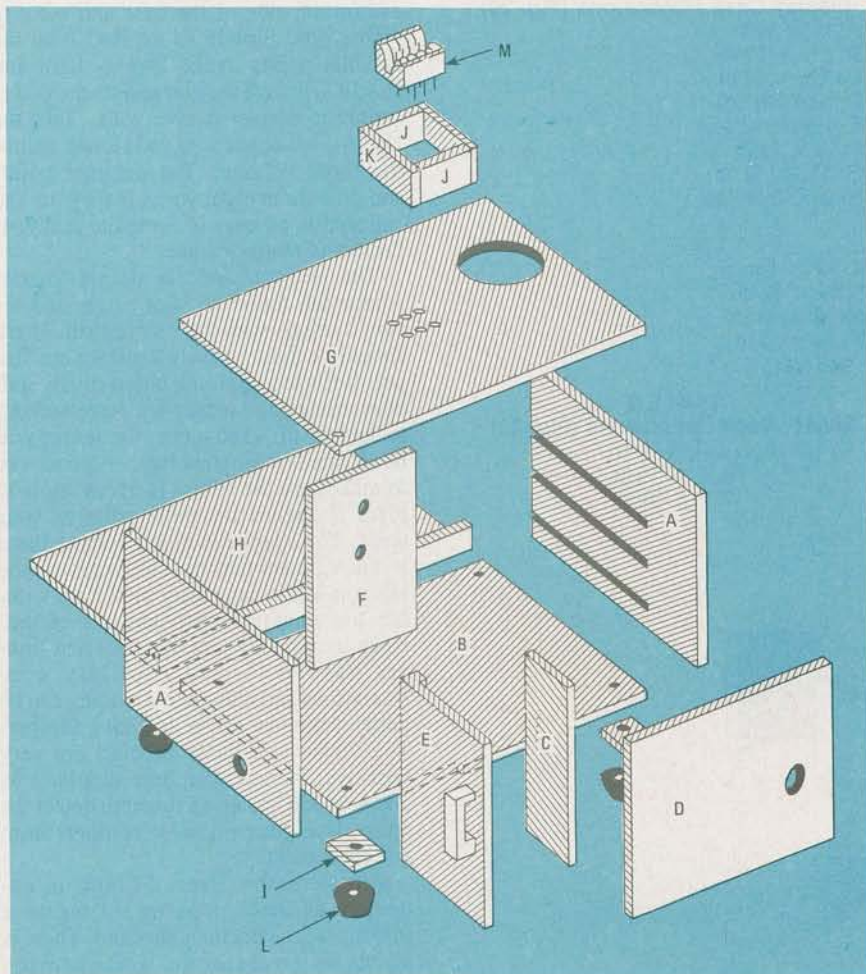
EXPLODED VIEW of the Heart-a-Matic's bottom case. The dimensions for that case are given in Table 1.
